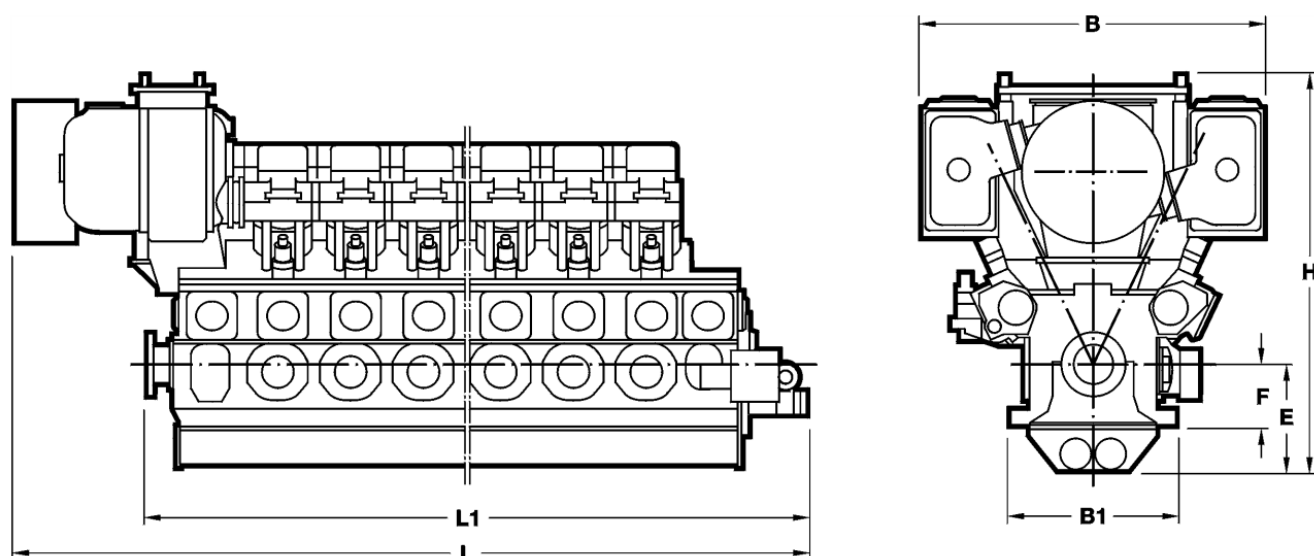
Overall dimensions of the M.A.N. 16V 48/60 CR engine:
